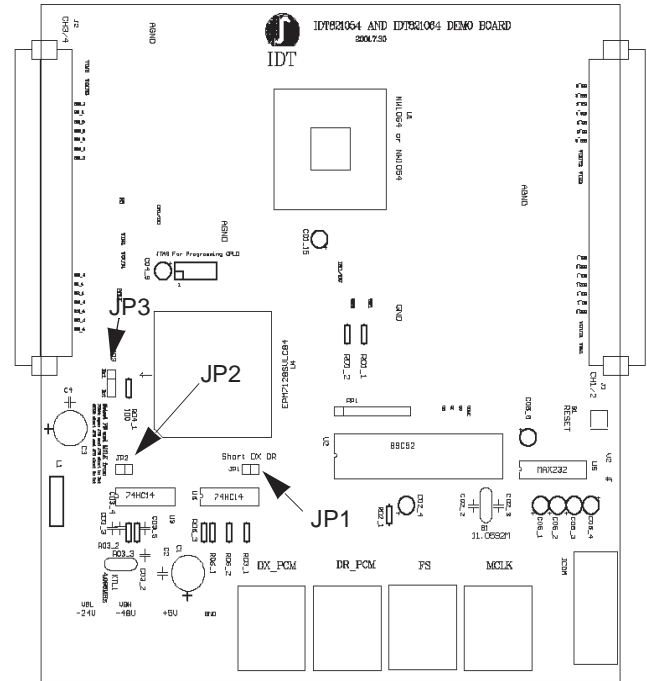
IDT821054 MOTHER BOARD COMPONENT LOCATION
